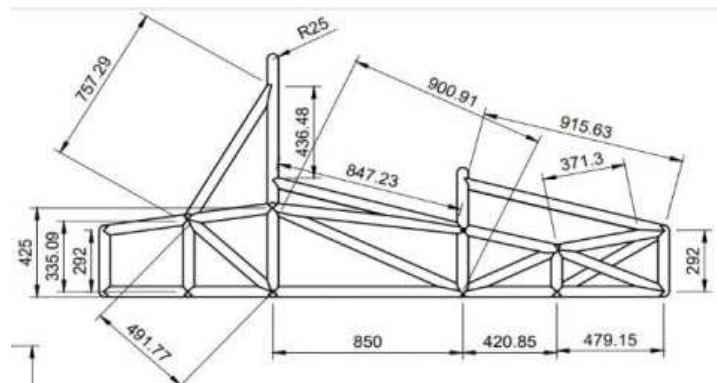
Side View of 2d Design Chassis (All Dimensions Are In Mm)
